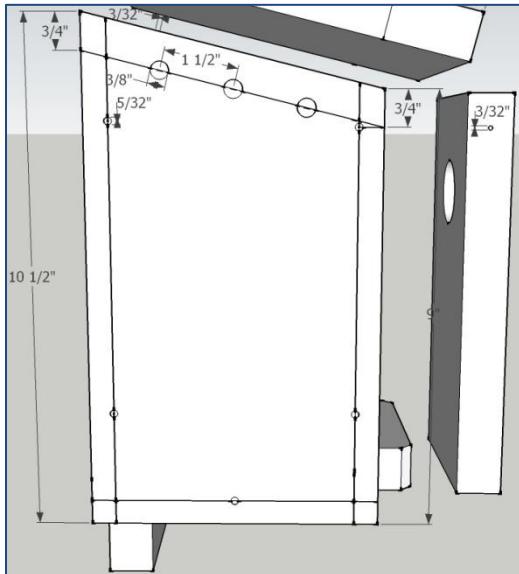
Nest box side panel 3/8" vent and 5/32" screw holes
